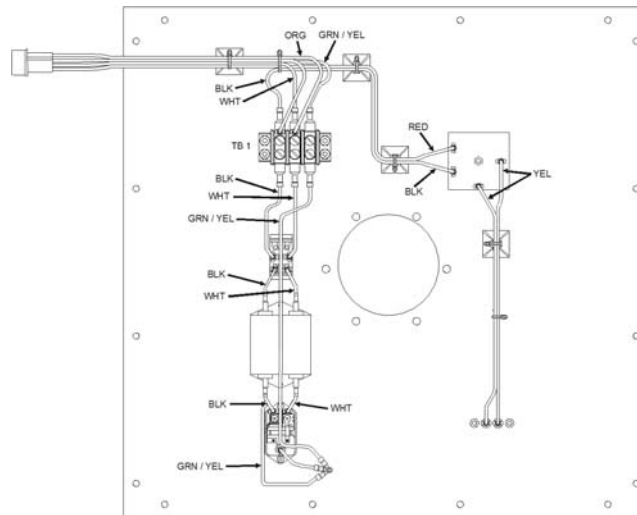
Removing the Load (Models AFTER 3/1/2010)
